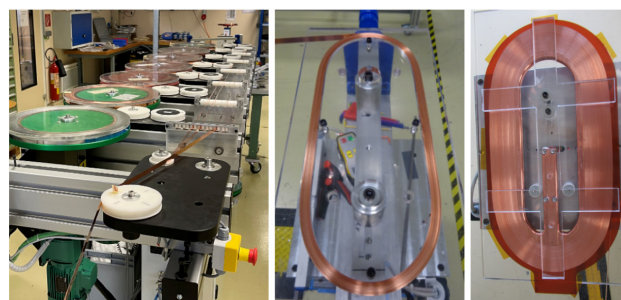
a) The winding machine with the 3 tapes, b) The HDMS coil winding, c) The complete coil.
